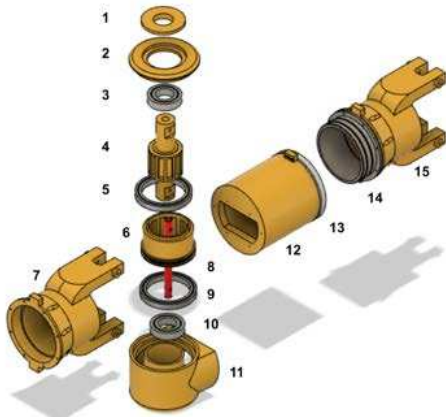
All parts comprising one tested RoboFish segment: 1- Inner joint housing lid; 2- Outer joint housing lid; 3 & 10- Zirconia ceramic bearing; 4- Driven shaft; 5 & 9- Stainless bearing; 6- Driving shaft; 7 & 15- Electronic housing; 8- Reinforcement Aluminum bar; 11- Joint housing; 12- Servo housing; 13- Female Stainless ring; 14- Male Stainless ring
